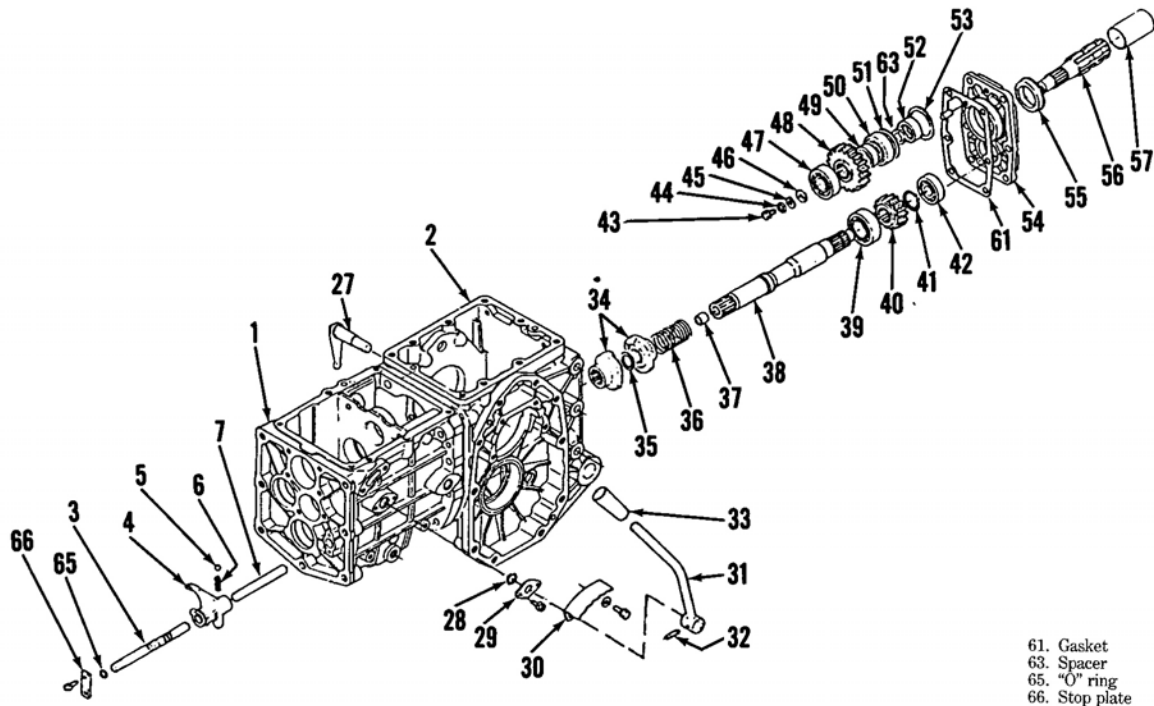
Exploded view of pto components used on Models B6100D, B6100E and B7100D. For identification of parts, refer to legend in Fig. 88 except for the following.
